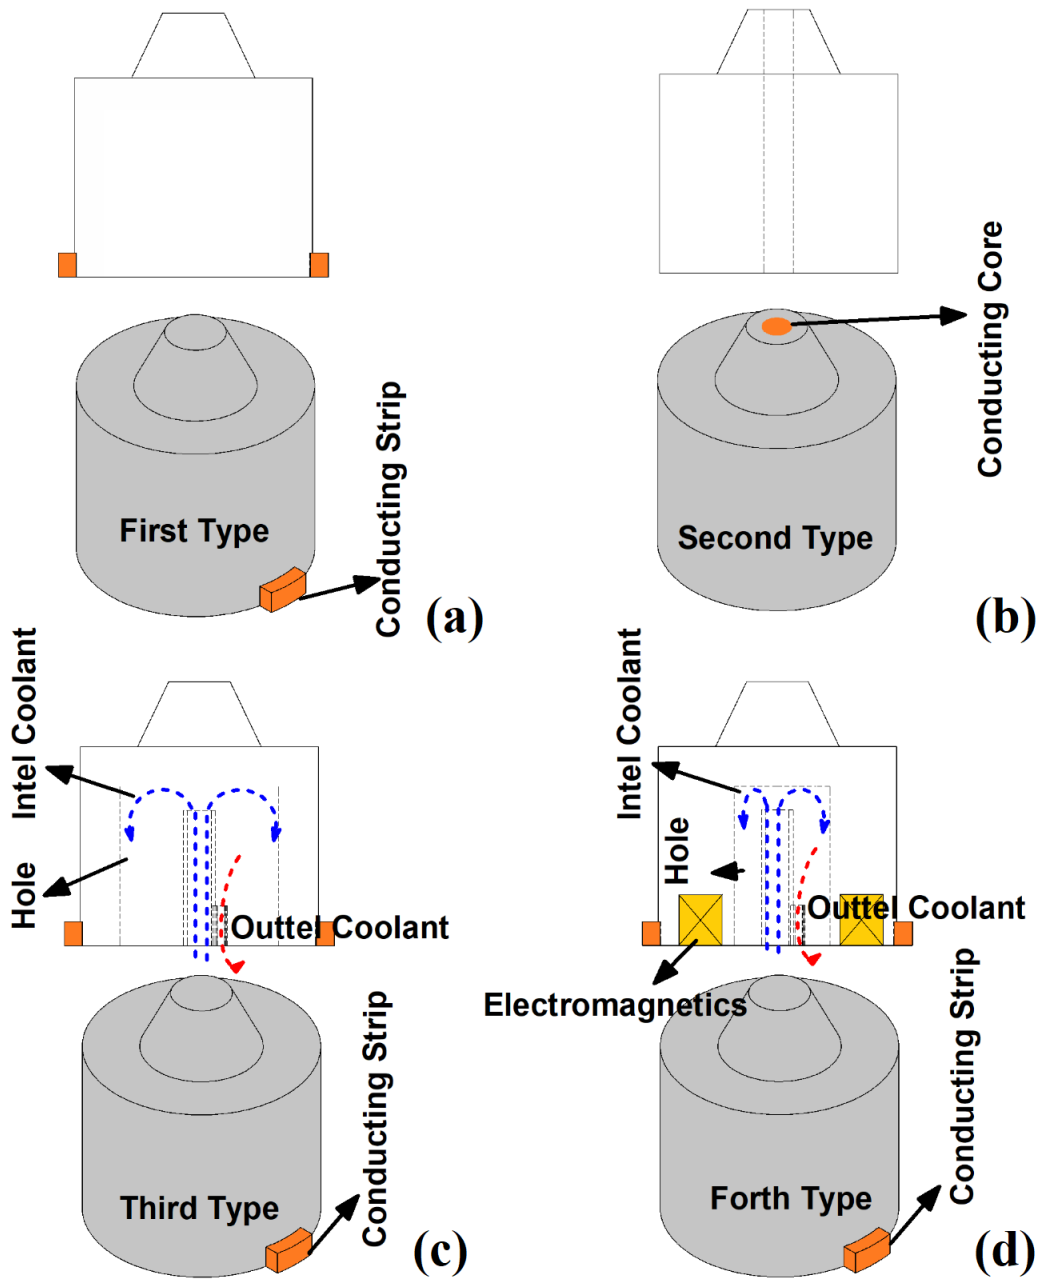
EA-FSW Tools, (a) Type a, (b) Type b, (c) Type c, and (d) Type d.
